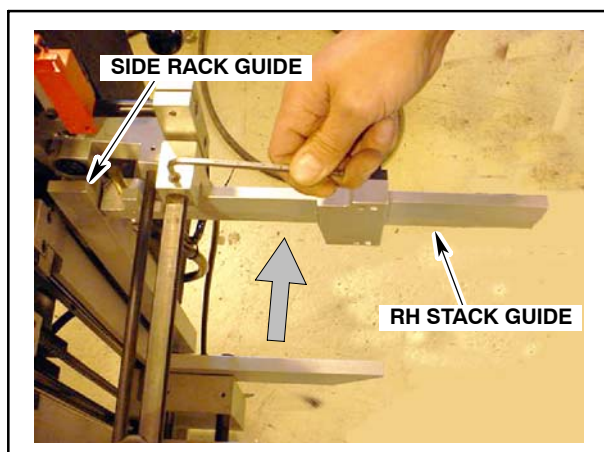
Slide the RH Stack Guide Flush with Side Rack Guide
